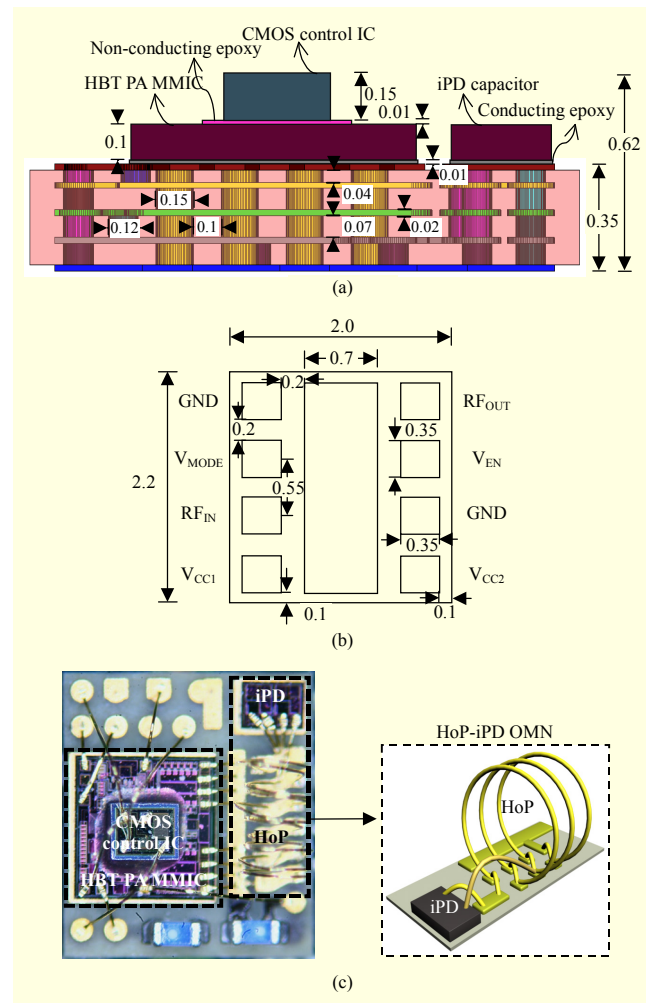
Fabricated PA module: (a) side view, (b) bottom dimension, and (c) top view.
